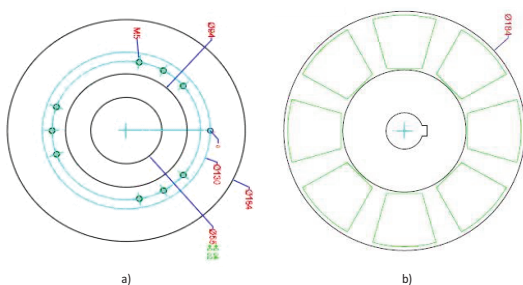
(a) Moving disc, and (b) rotor drawings of EASM motor.
